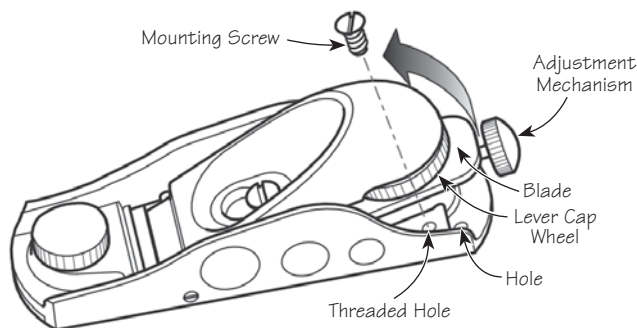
Heel of blade moved to expose threaded hole for mounting ball tail.
